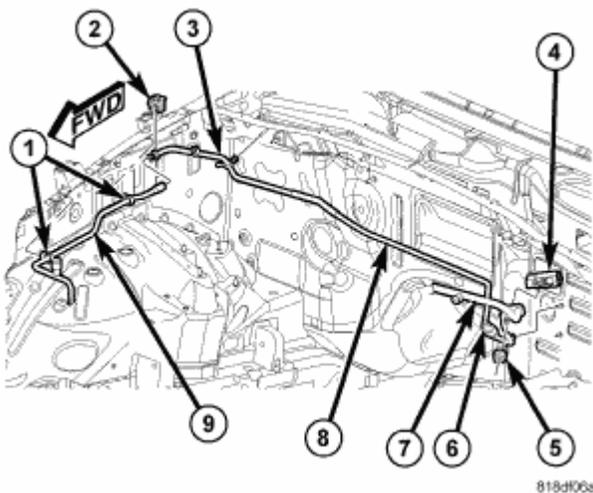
Removing/Installing RHD Liquid Lines - Rear Section
